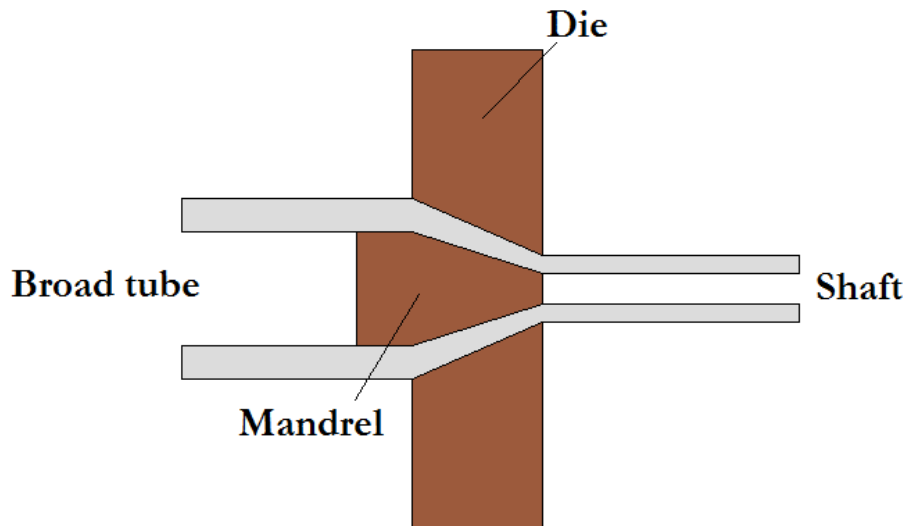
Schematic diagram to show a metal shaft fabricated by drawing.
